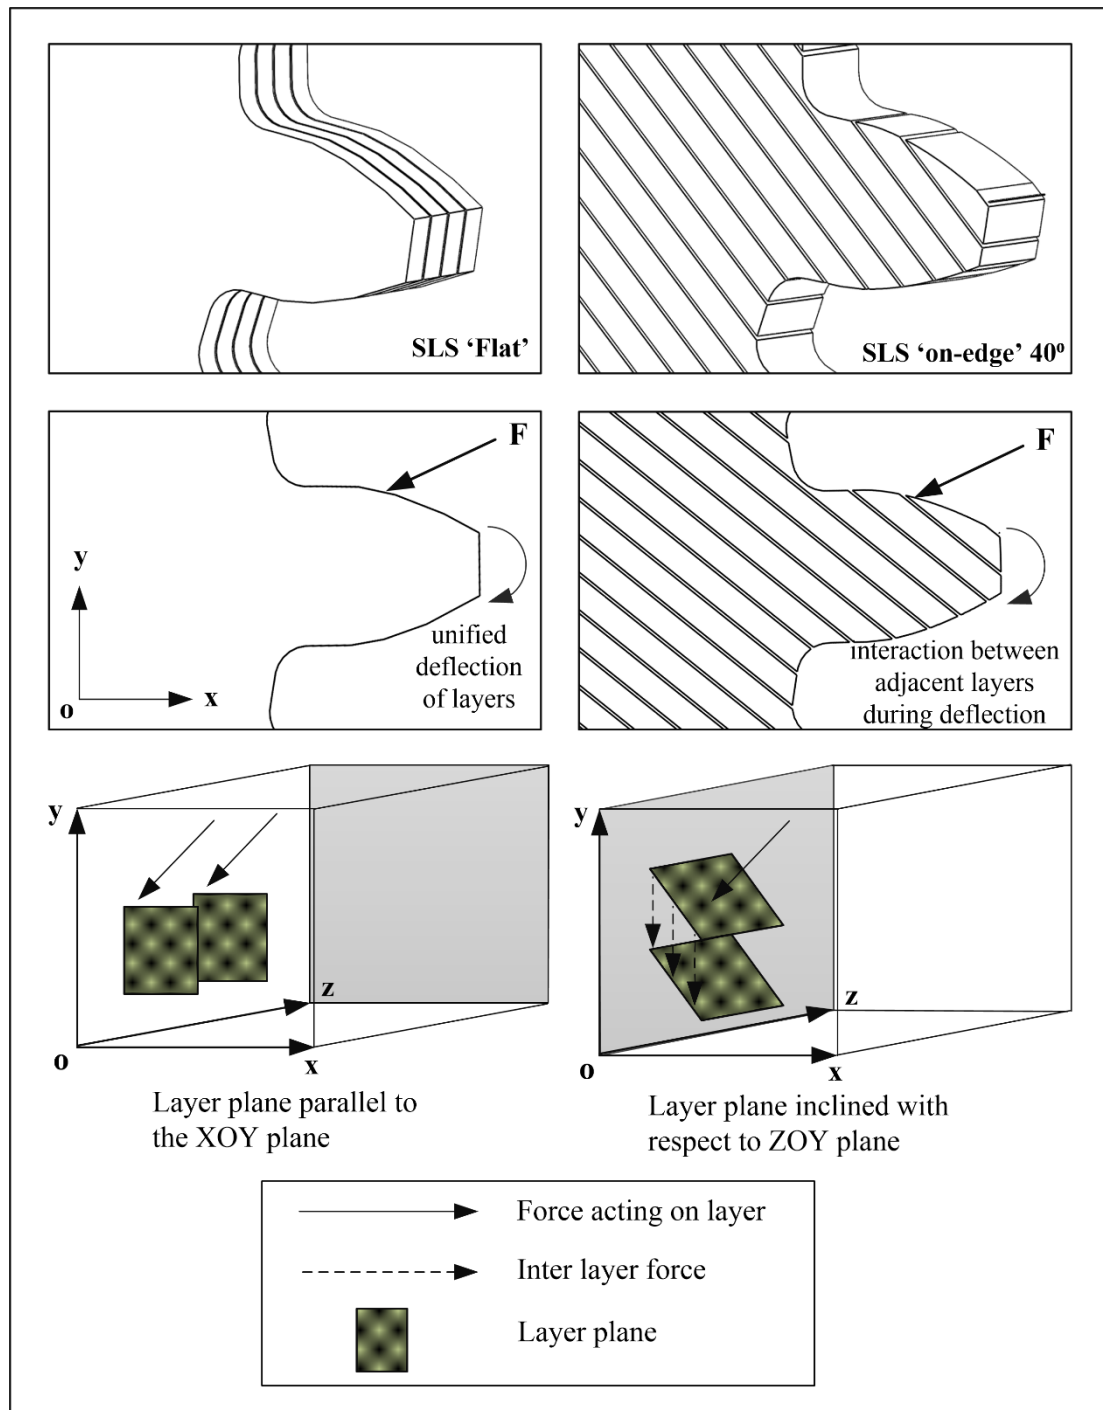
Orientation of layer planes in selective laser sintered gears.
